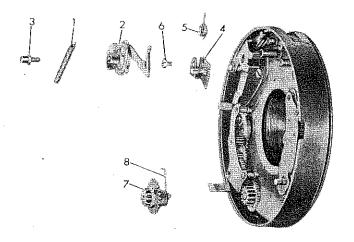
Parts on Shutter Mechanism Plate, Partially Exploded (I)
